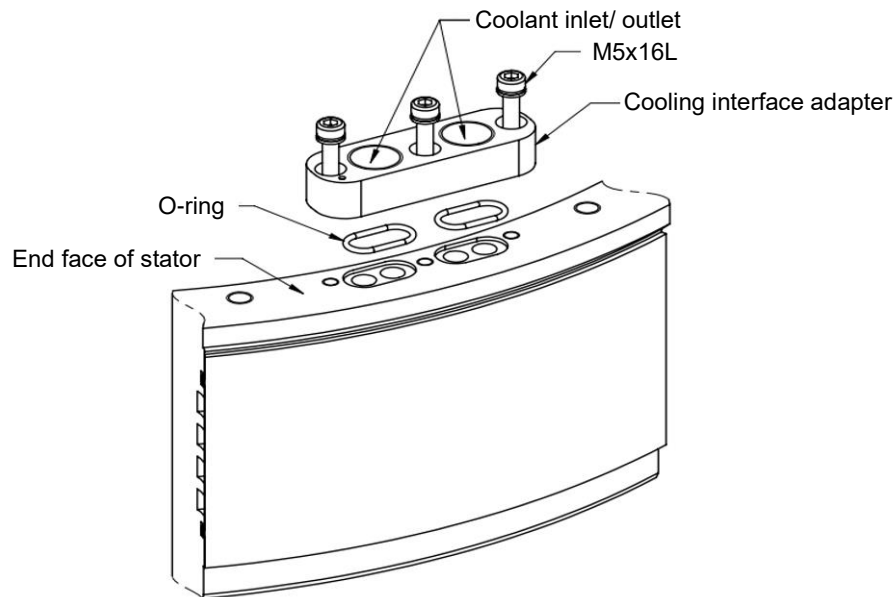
Parts Configuration of Cooling interface adapter
